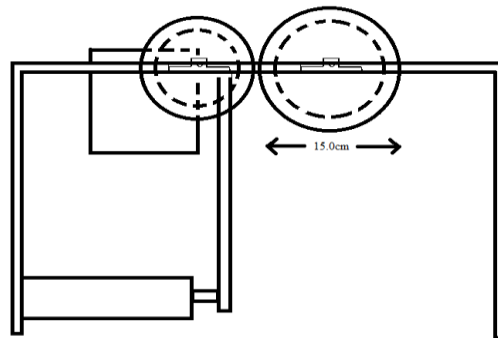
Side view of the Machine (AutoCAD Diagram)
